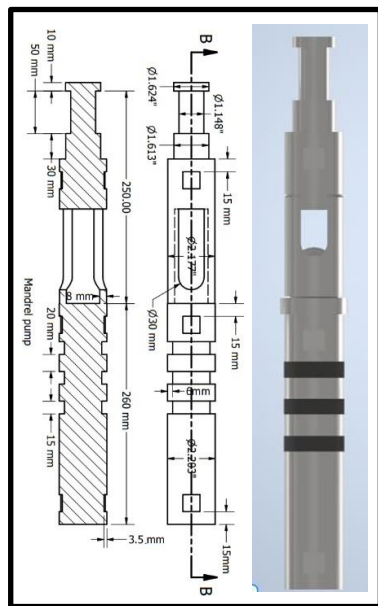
8 Mandrel RW & Cage Top TH Sketch & 3D
